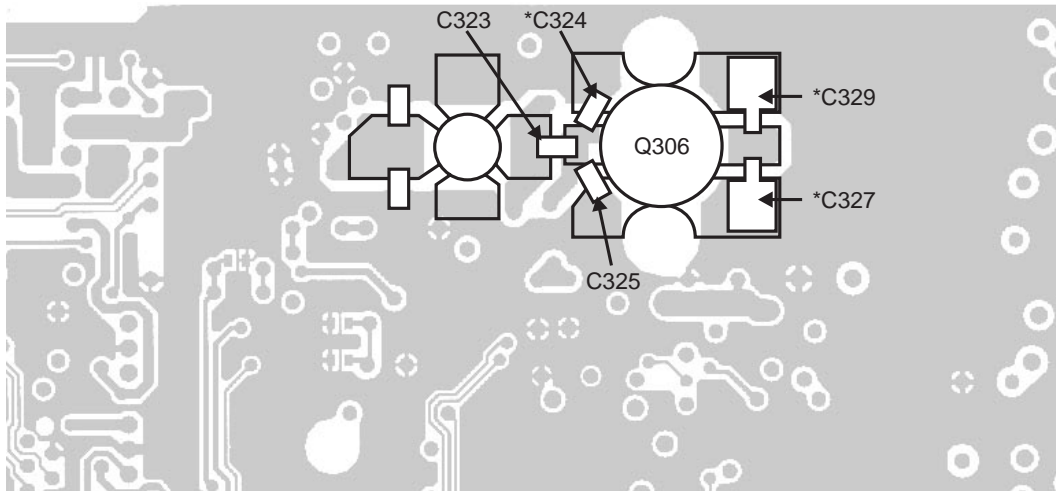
T2000-500/600 PA - Bottom Side
